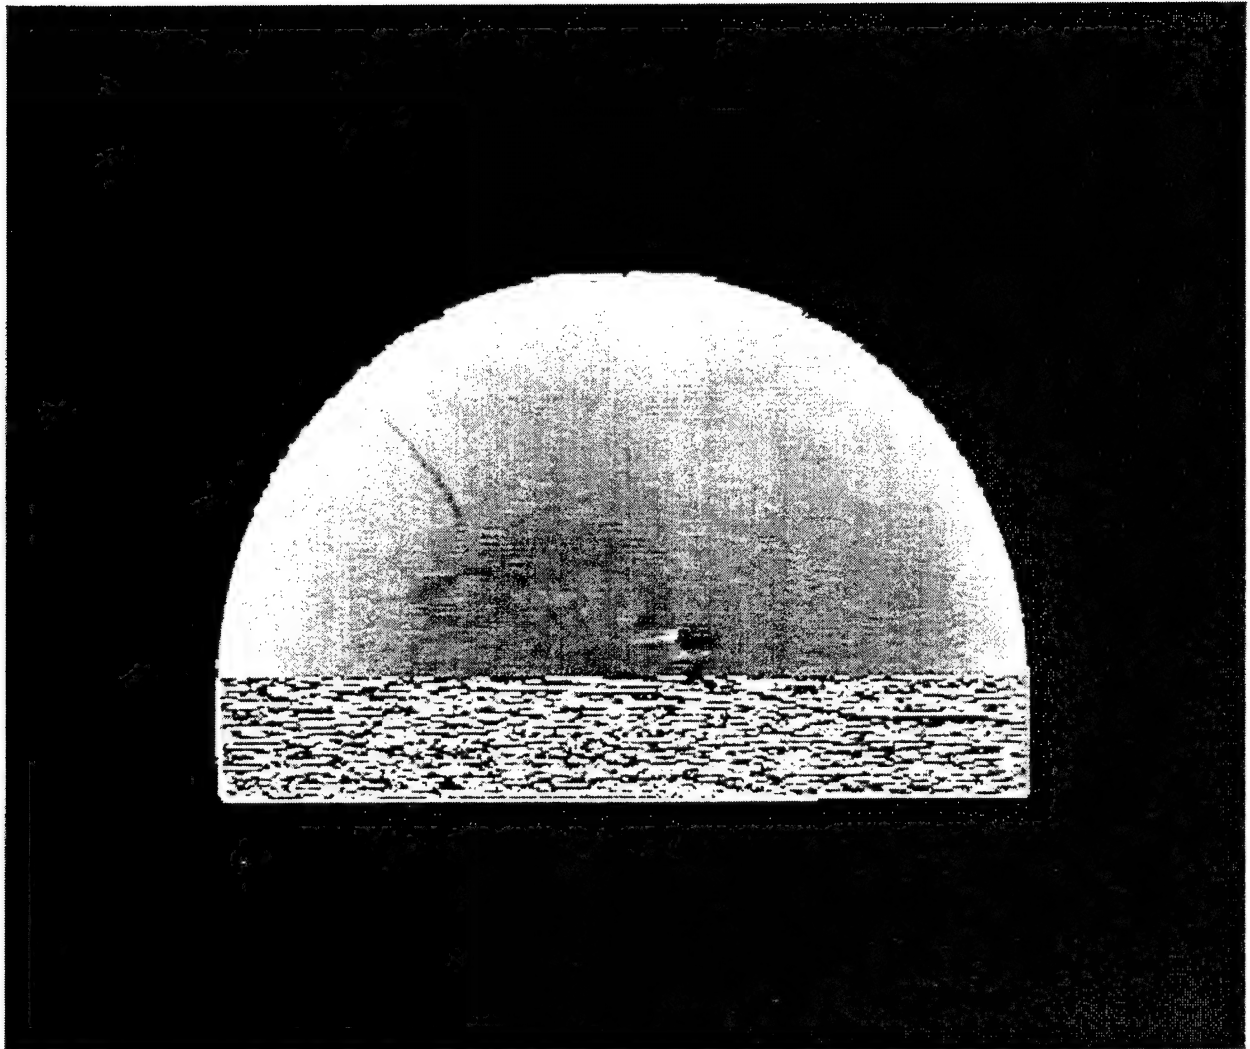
23.35 mm from bottom of disk with 65° rotation about X-axis.
